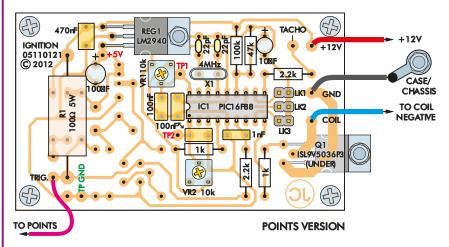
this is the Points version. Secure the 100 Ω 5W resistor (R1) to the PCB using neutral-cure silicone, to prevent it from vibrating and fracturing its leads and/or solder joints.
